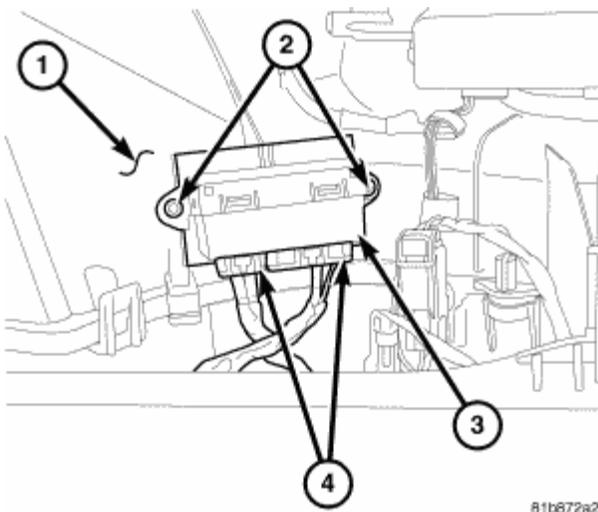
HVAC Housing, Screws, Blower Motor Power Module & Wire Harness Connectors
